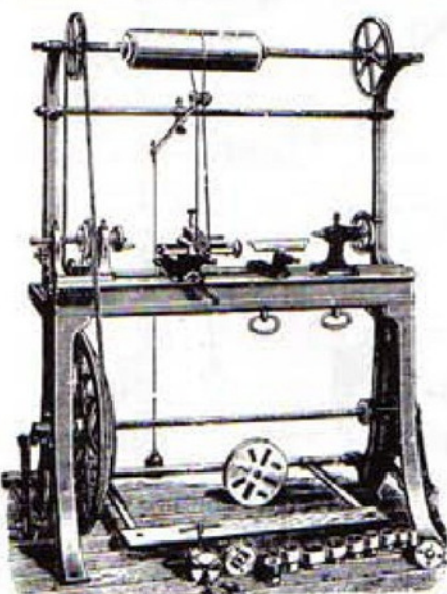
Overhead drive attachment on a lathe, from an illustration in Model Engineer, 1898.
